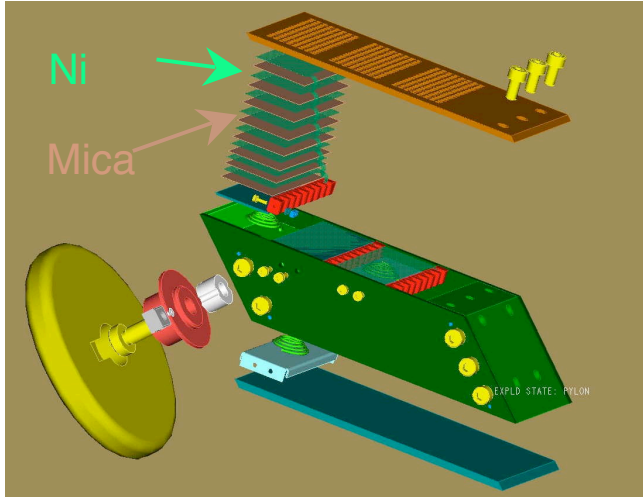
Exploded view of a single pylon, showing the top plate with aperture holes, a stack of alternating Ni foils and mica insulators, terminal blocks, foil stack mounting recesses, backing plate and spring, and carbon-carbon composite protective tile with mounting hardware.
